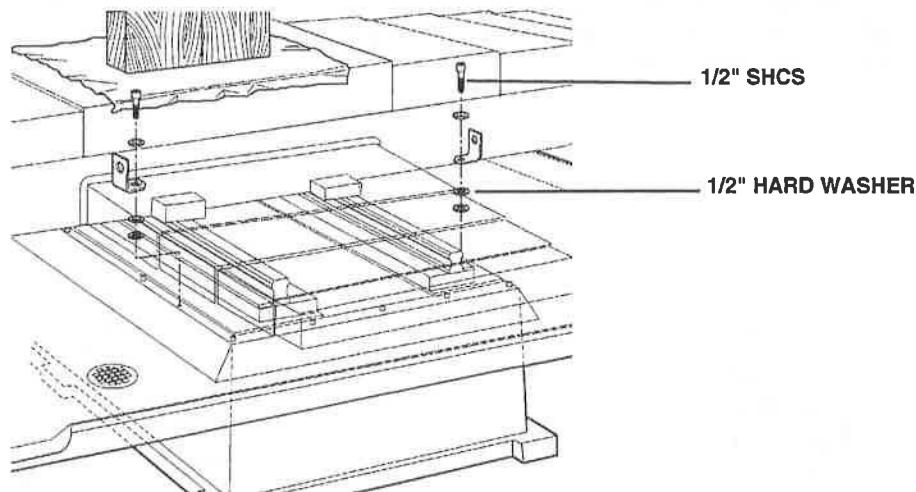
Lifting bracket mounting location for VF-3 and VF-4.
